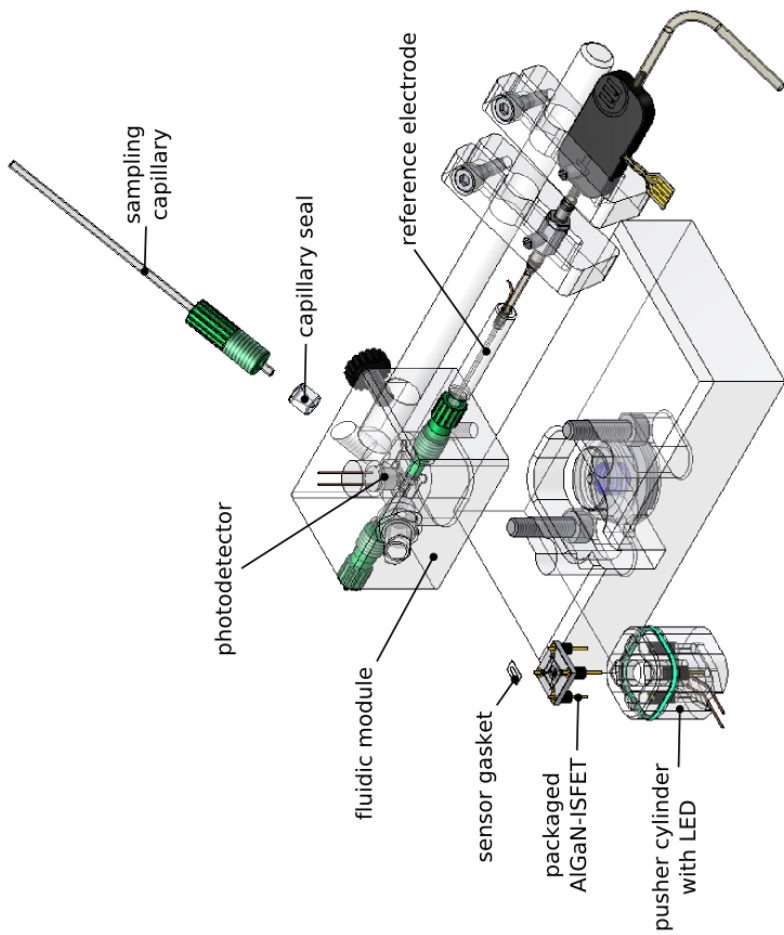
Exploded assembly drawing of the micro-blood-pH measurement cell.
